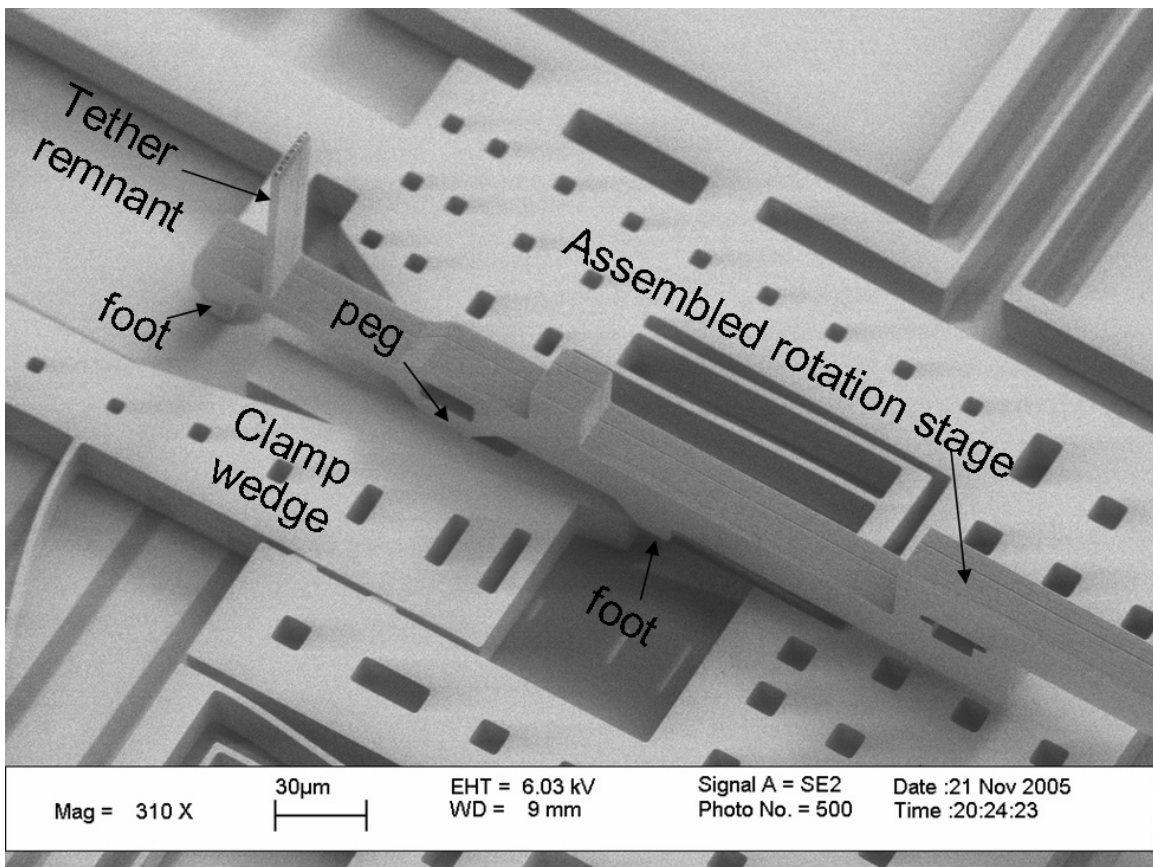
Close-up electron micrograph of interface between assembled part and moving clamp. Visible is the back end of the rotation stage mechanism and details of how it inserts into the fully-suspended clamp.
